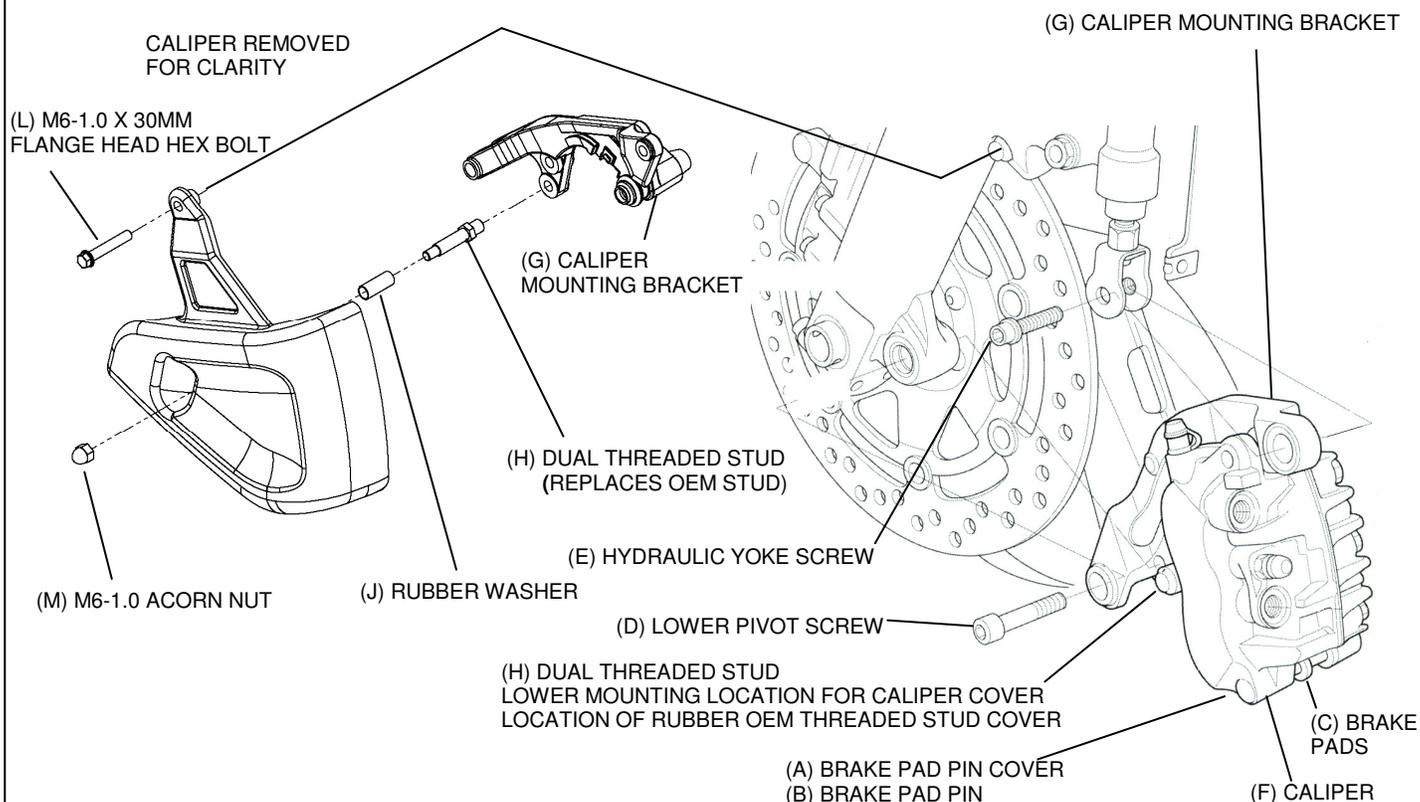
LEFT SIDE CALIPER REMOVAL AND CALIPER COVER INSTALLATION (RIGHT SIDE NOT SHOWN)
